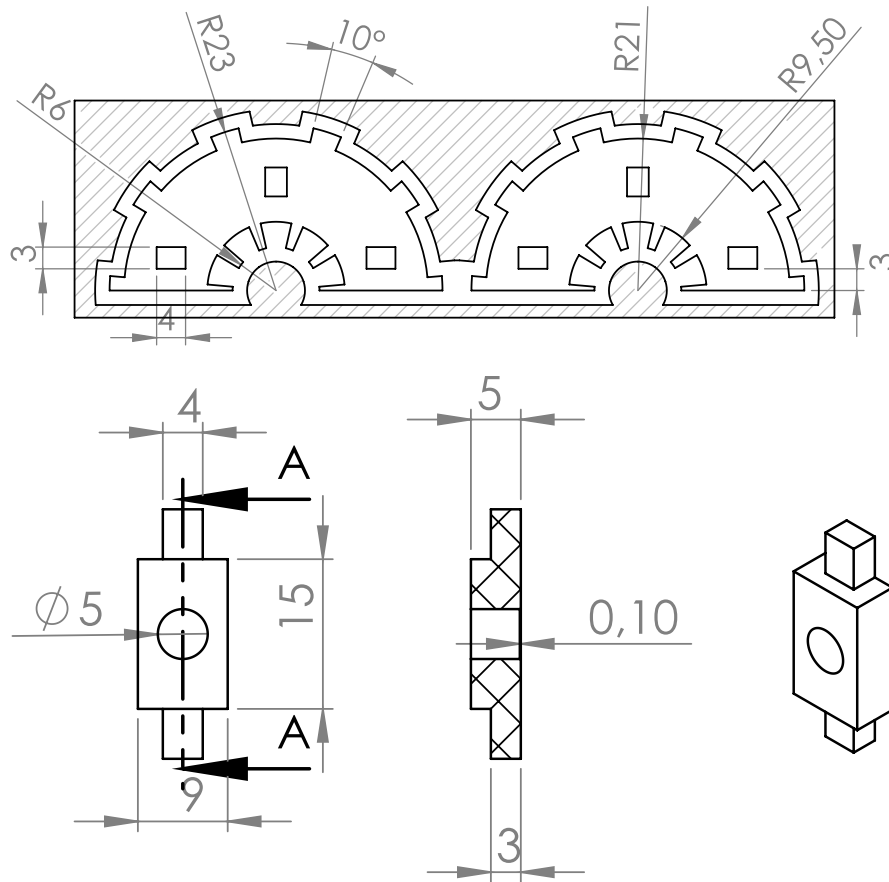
Technical drawing of the two plates for the axial resonator as well as the spacers used to define the distance between the PTFE plates. The plates are made on the milling machine, which only cuts out the part between the coil part and the striped area. The striped area is only there to quicken the milling process. For more details, see text. Dimensions in mm.
